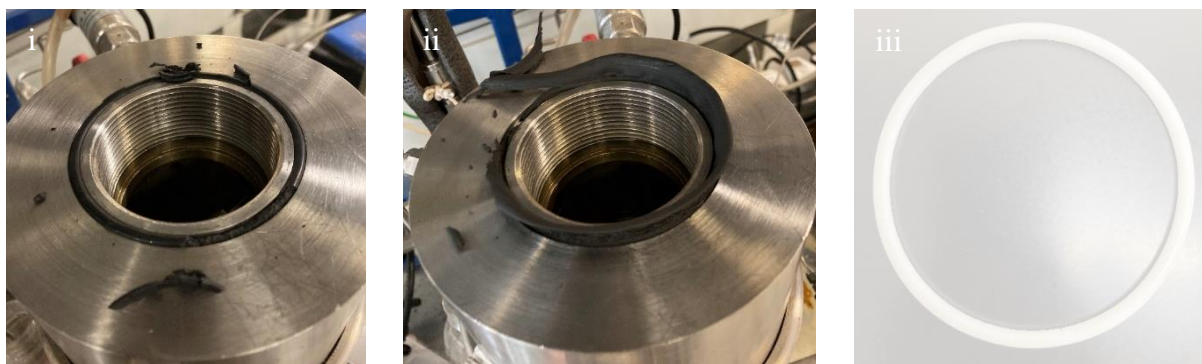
Photographs of O-rings; i) damaged NBR O-ring, ii) damaged FKM O-ring, iii) fitted PTFE O-ring.
